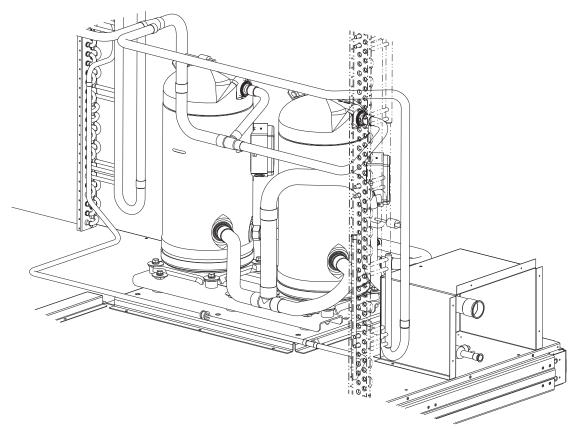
569L*25(M,N) Compressor Assembly (Rear View)
